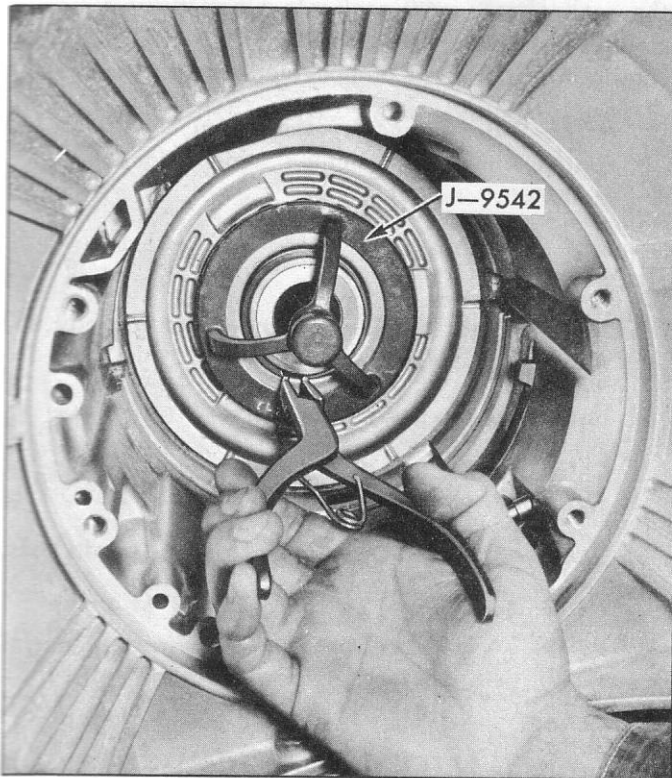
Removing Rear Piston Spring Retainer Snap Ring
